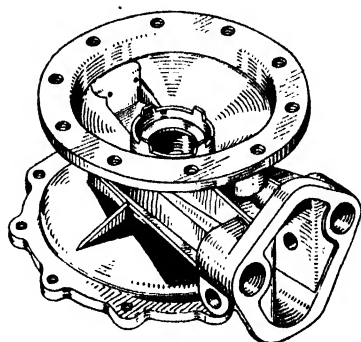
With a complex die casting of this shape, slides forming the side walls of the cavity are required. This involves an expensive die but is fully justified, as many thousands of castings are required and the slides form undercuts that save a great deal of metal, besides providing flanges to fit mating parts, thus facilitating ready assembly.
